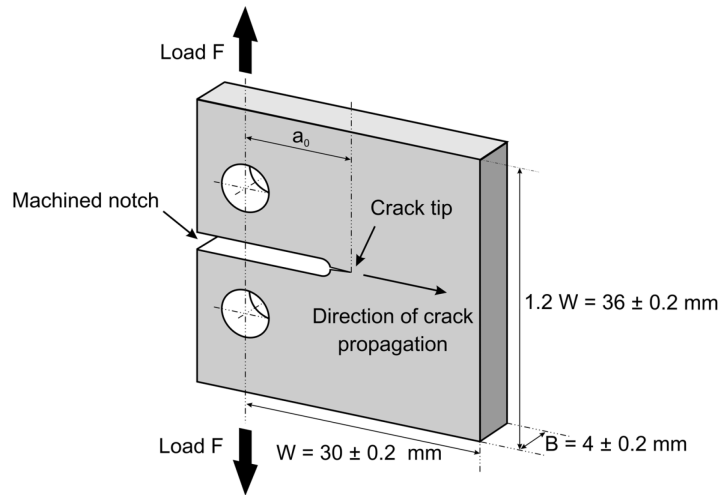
Geometry of Compact Tension samples used for fracture testing in mode-I condition.
